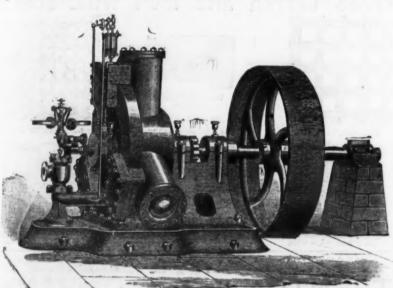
Side View of Engine Arranged for Stationary Purposes.
